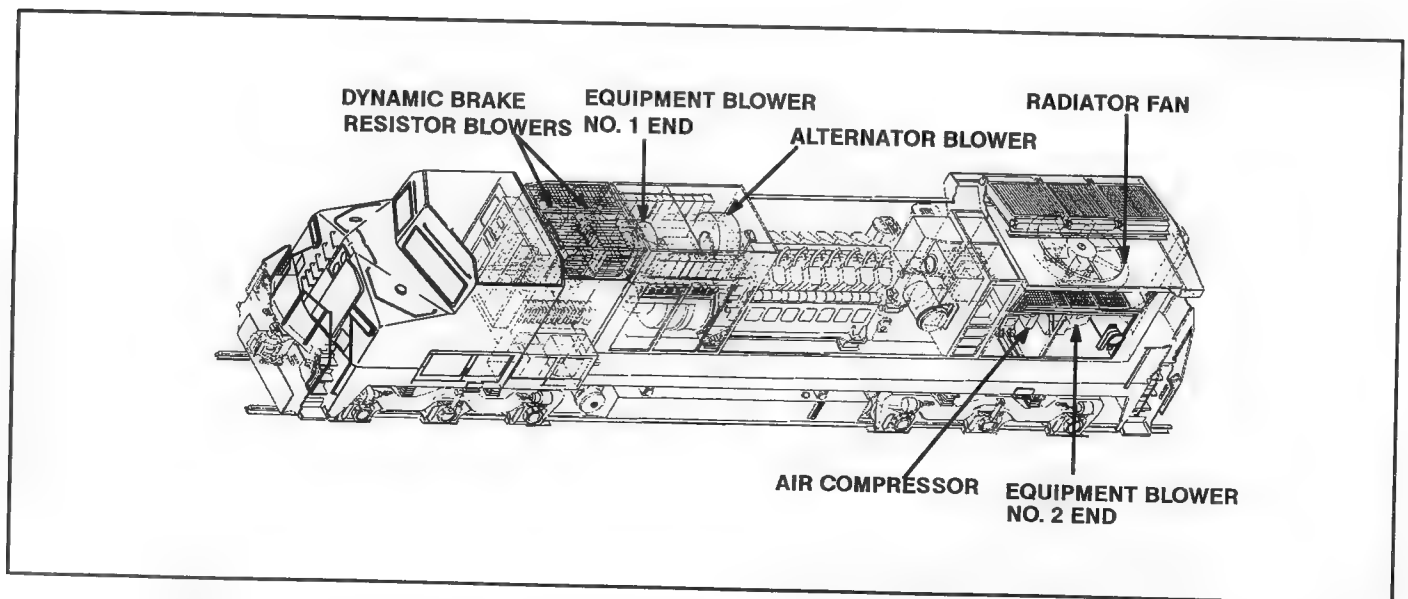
LOCATION OF EQUIPMENT, DYNAMIC BRAKING AND ALTERNATOR BLOWERS AND RADIATOR CAB. E-38381.
